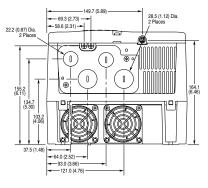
VTAC 9 Frame B...E NEMA Type 1 Bottom View Dimensions
